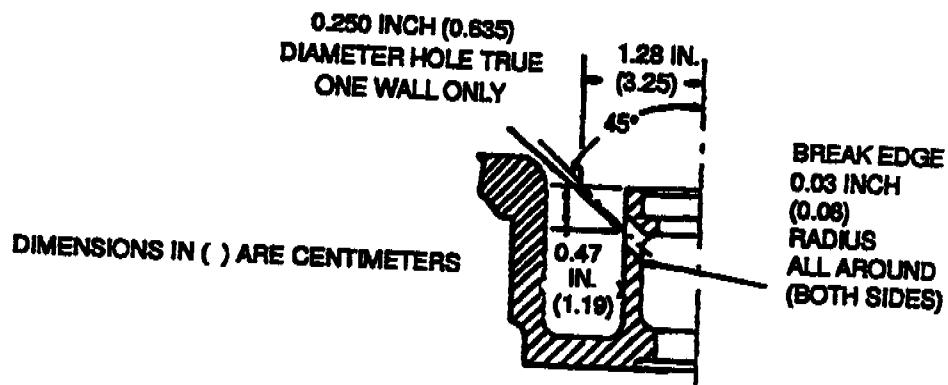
Accessory Gearbox Housing- Repair Area.
